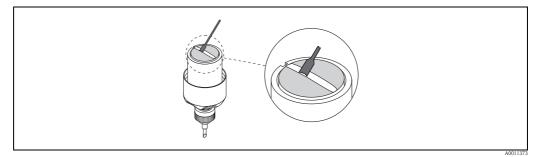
Coating the contact surfaces of the sensor with coupling fluid
